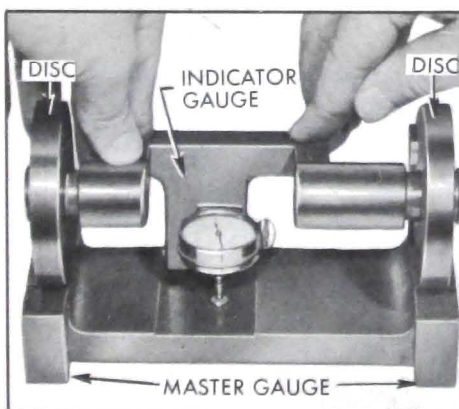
Zeroing Pinion Setting Gauge J-8619
